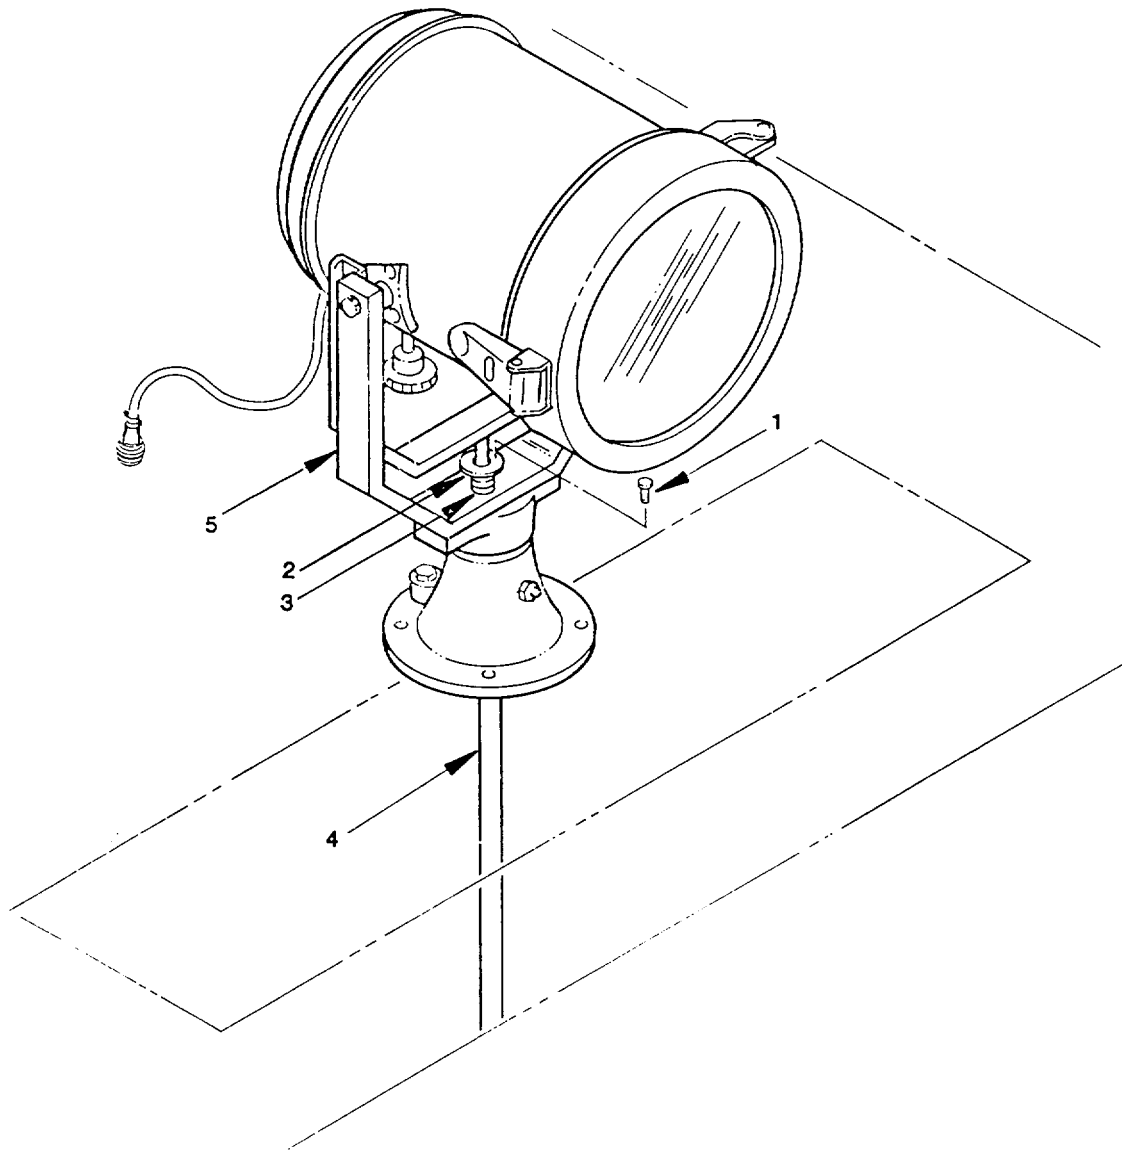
Push-Rod Packing, Spotlight. Remove/Install.
